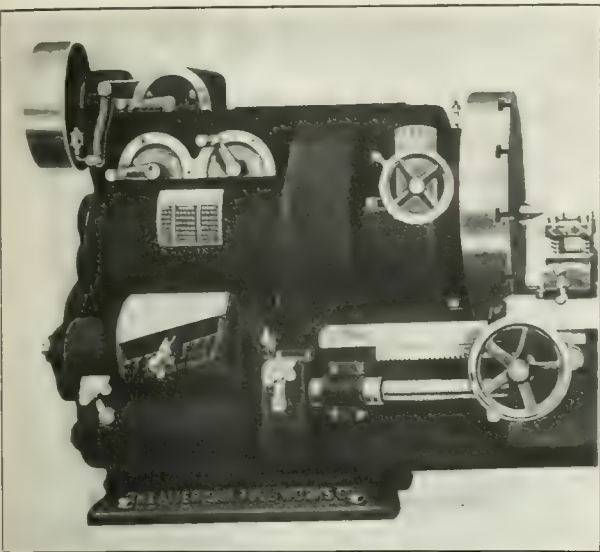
The Headstock of the Belt-Driven Geared Head Tool.
